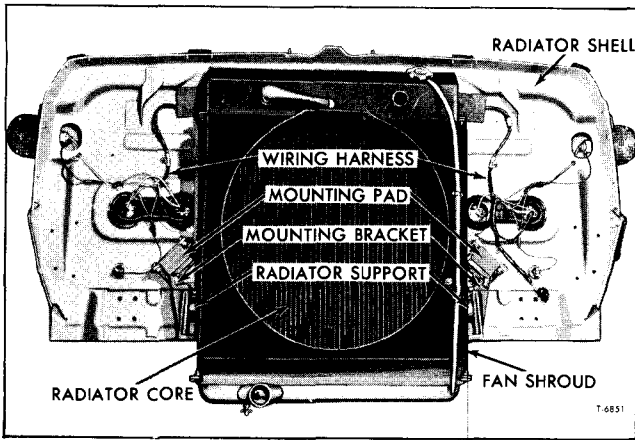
Radiator Shell Removed Showing Core Removed (Typical)
